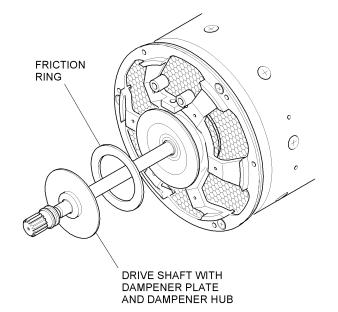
Removing the Drive Shaft, Friction Ring and Dampener Plate
